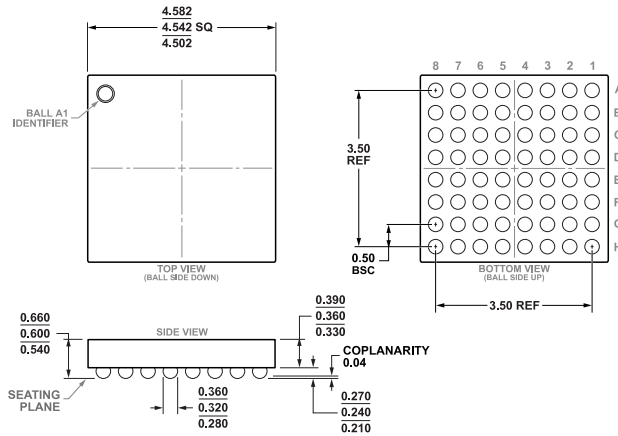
64-Ball Wafer Level Chip Scale Package [WLCSP] (CB-64-5)
